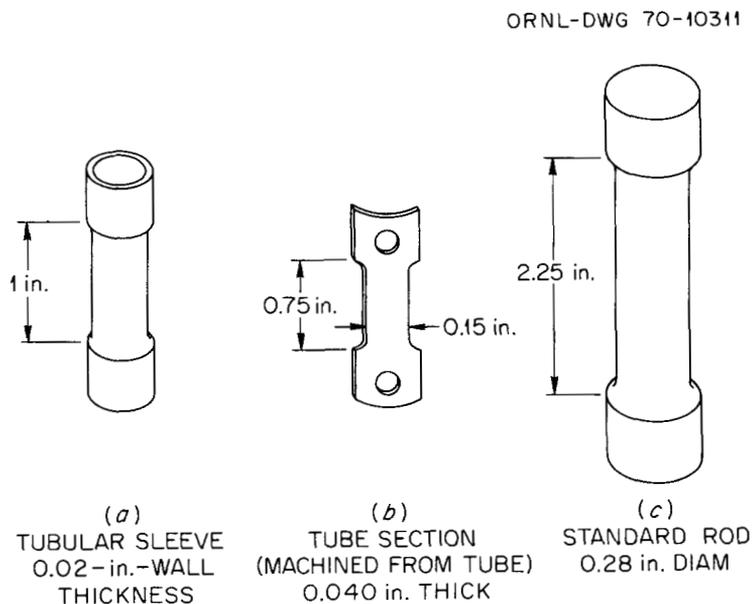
Tensile Test Specimen Geometries for Type 316 Stainless Steel.
